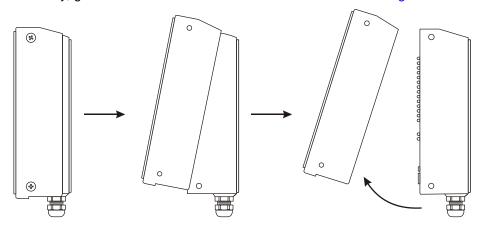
Opening the XR 4500 / 4500TL / 6500 (side view)
